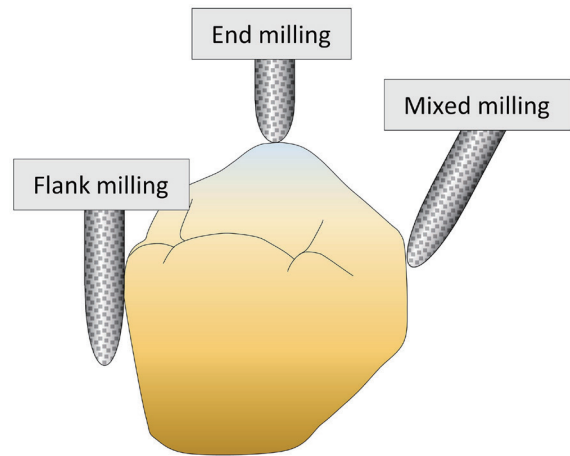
Tool milling mode applied on a dental crown. Depending on the relationship between the milling tool or bur and the prosthesis surface, it can be called end milling when the tip is in contact, and flank milling when the body is in contact. Most of milling machine adopt a mixed milling method.
